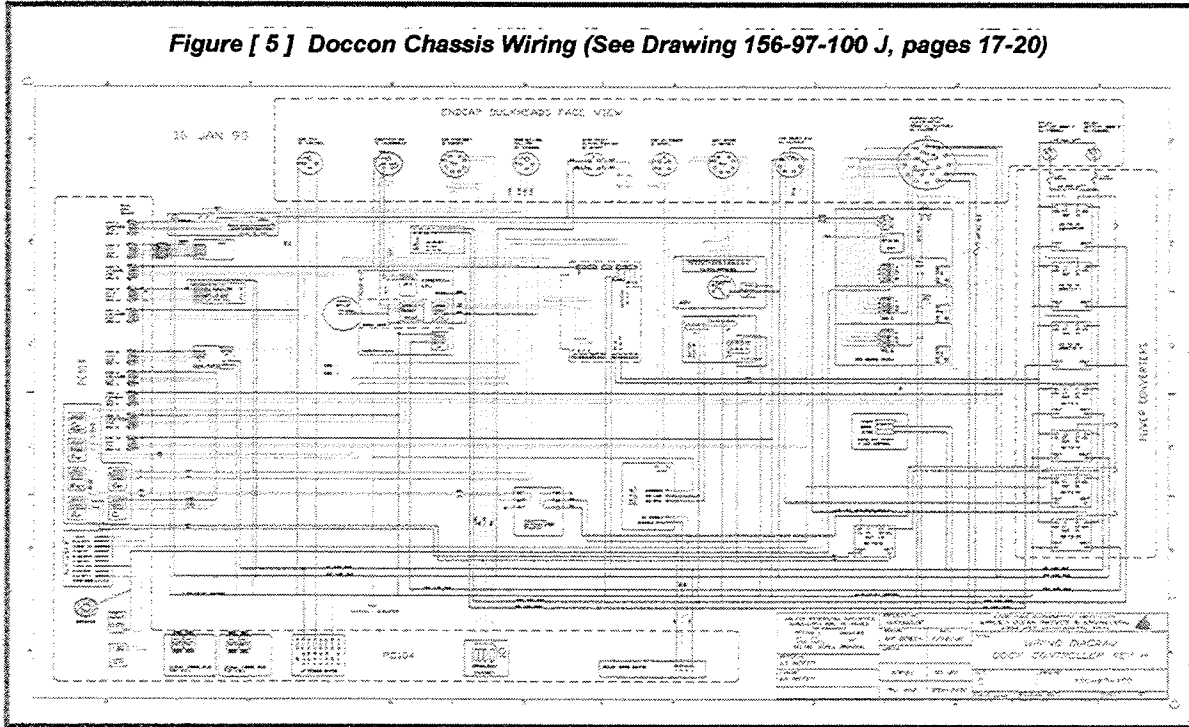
Doccon Chassis Wiring (See Drawing 156-97-100 J, pages 17-20)
